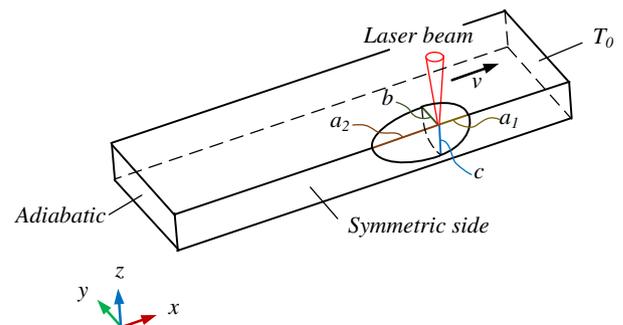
The laser welding model with the double ellipsoid volume heat source [6].
